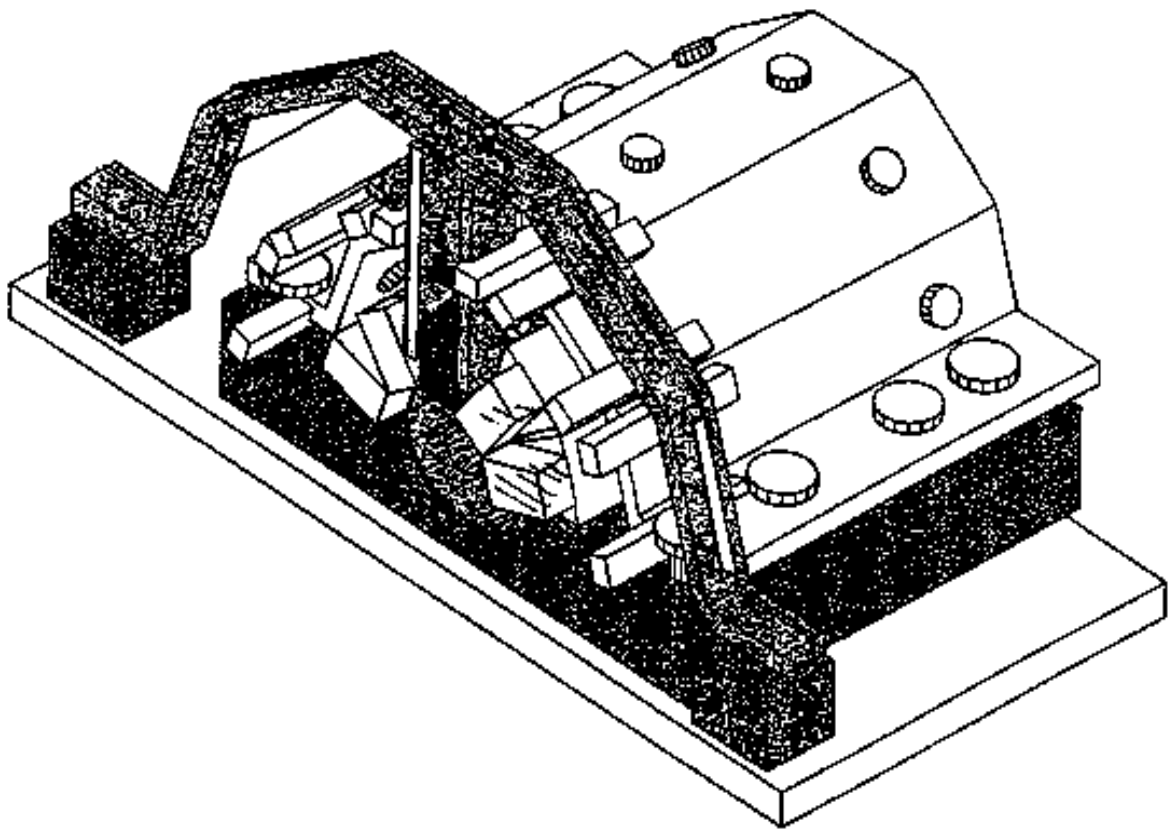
Test Section Assembly with Heaters and conceptual Holding Fixture (see Figs. 21 and 20 for Component Labeling and Details).
